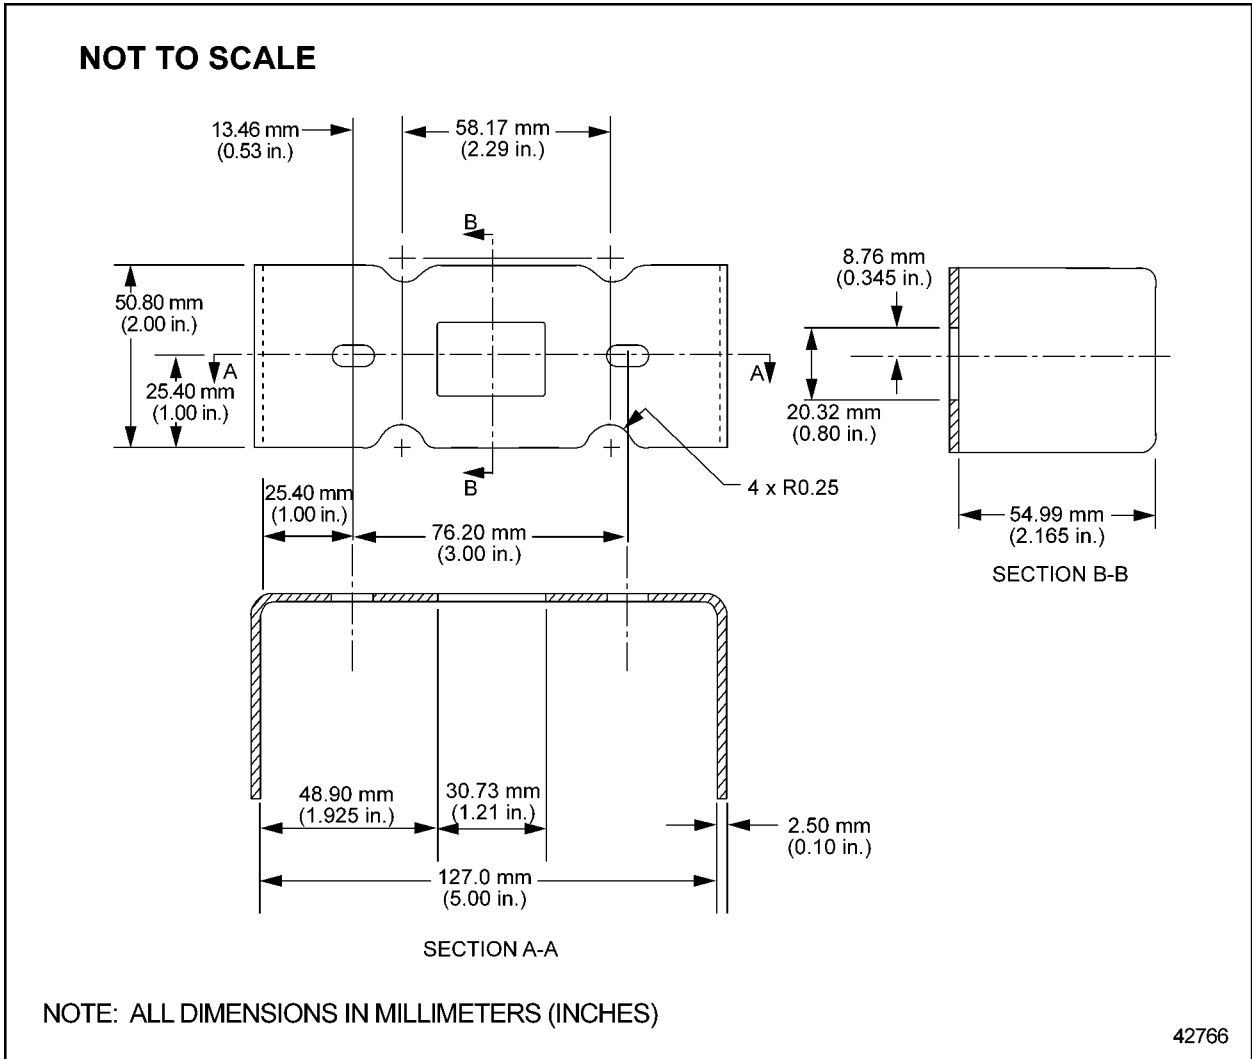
ProDriver DC Flush Mount Mounting Bracket
